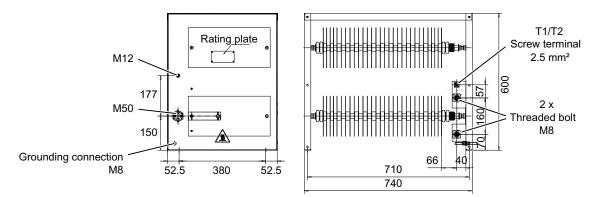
Dimension drawing for braking resistor 25 kW, 125 kW (option L61 / L64)
